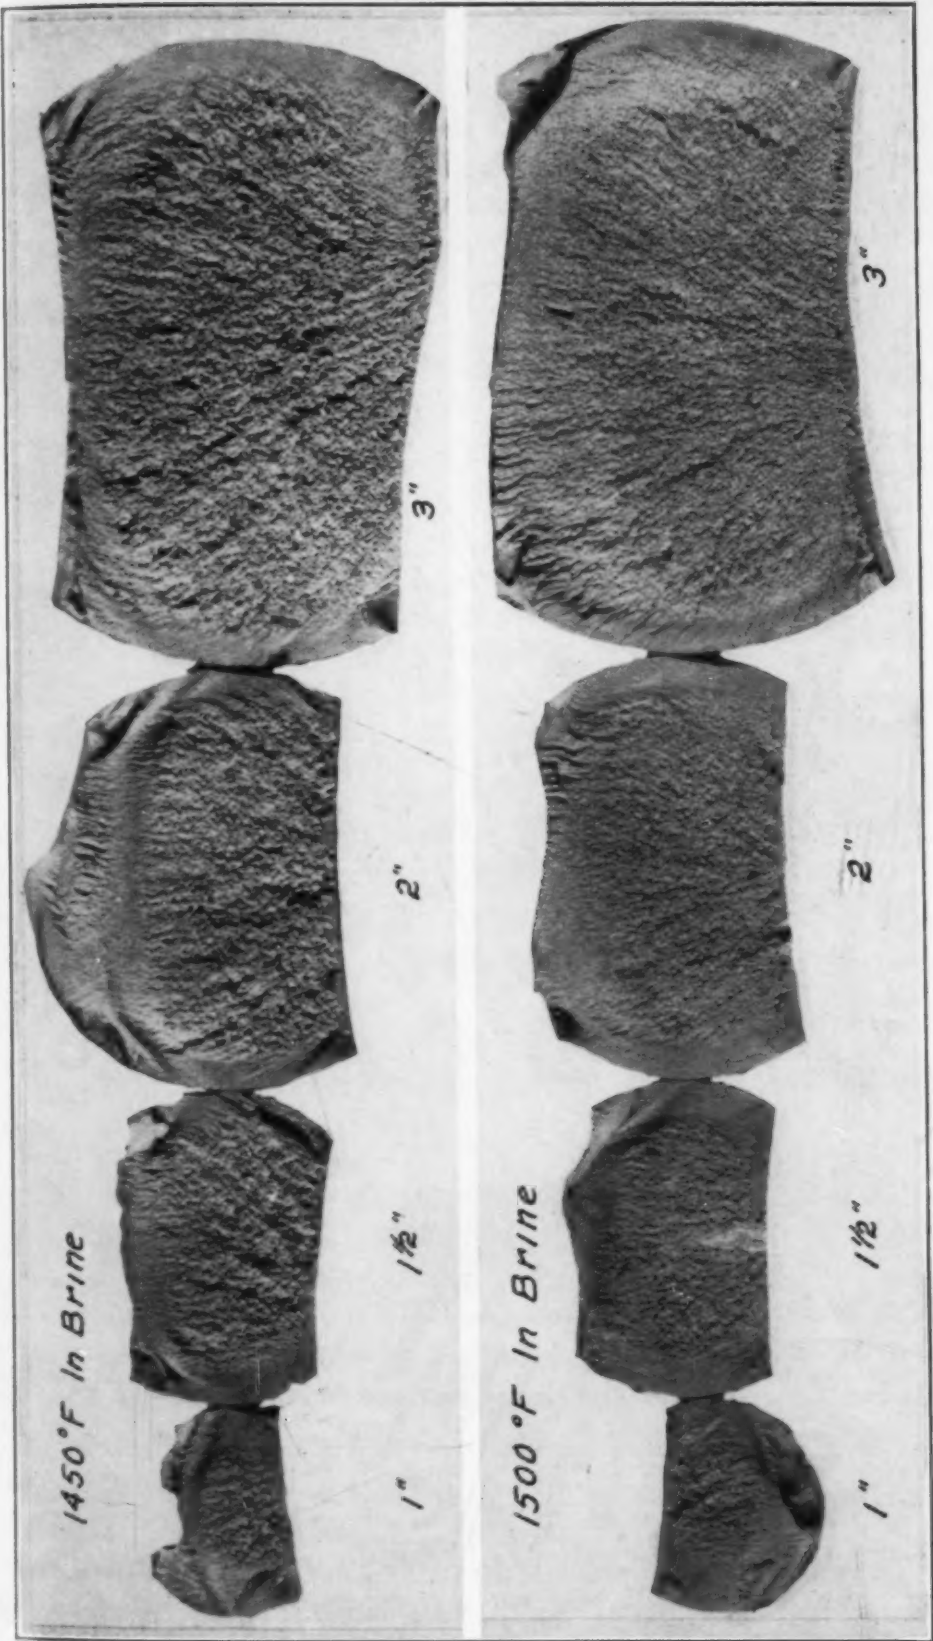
Fracture Grain Size of Carbon-Chromium Tool Steel (0.45 Per Cent Cr).
